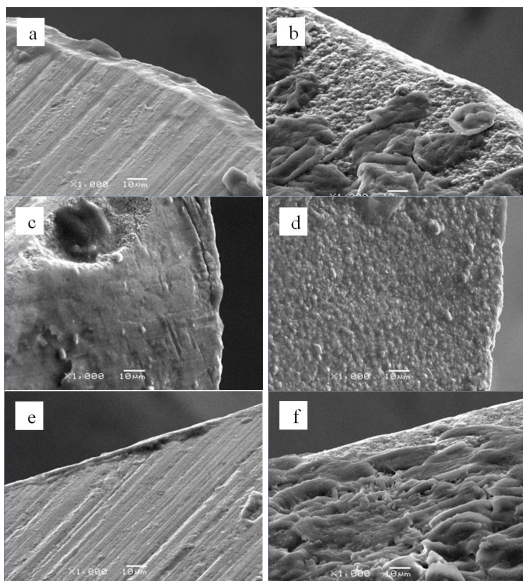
SEM micrograph images of worn samples after the machining test: (a) original drill, main cutting edge; (b) BDD drill, main cutting edge; (c) original drill, minor cutting edge; (d) BDD drill, minor cutting edge; (e) original drill, chisel edge; (f) BDD drill, chisel edge
